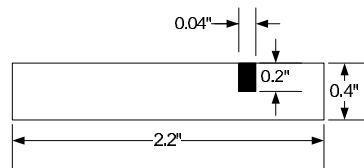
Dimension of crack staged on the impeller blade.
